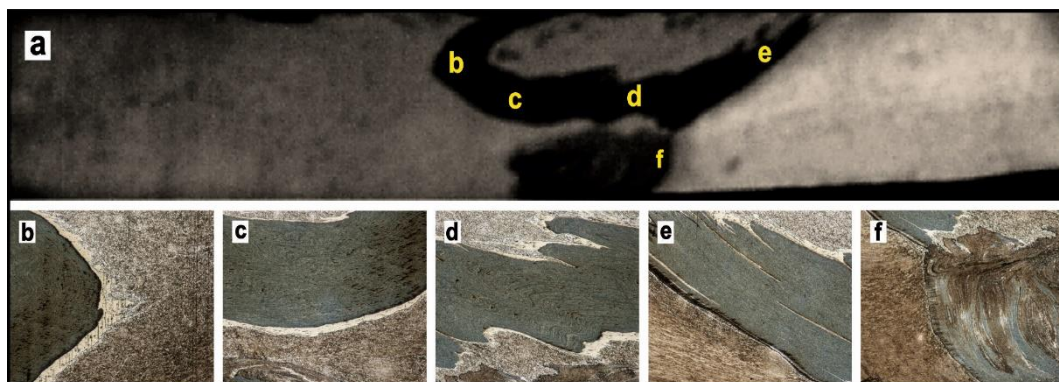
The cross-sectioned surface of FS welded joint and the microstructures of a welded joint (E2)
